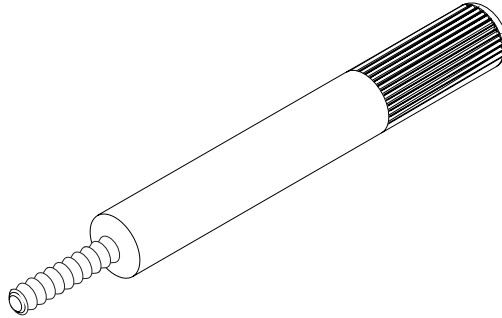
CPUset Module Locking and Motherboard Ejection Tool
